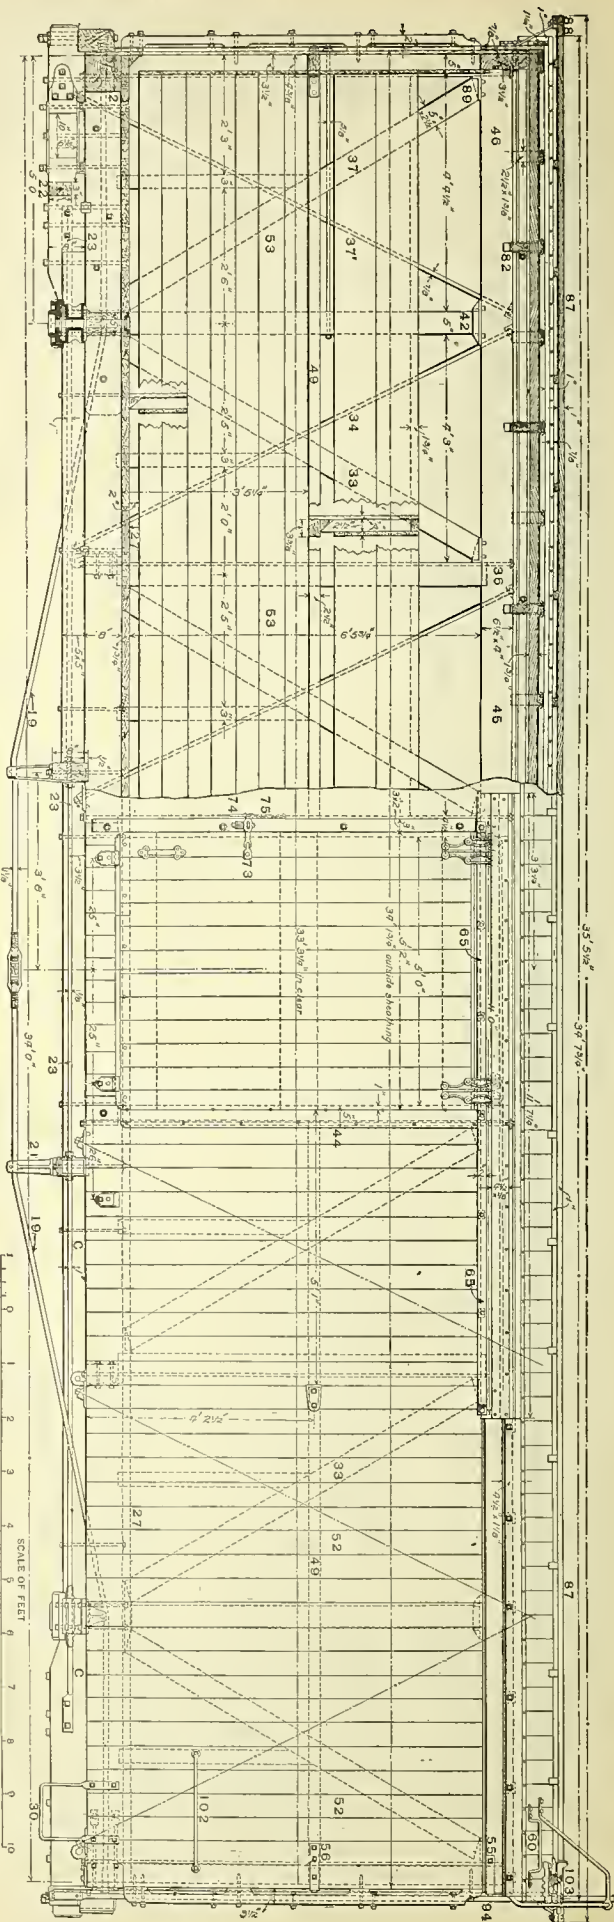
Part Longitudinal Section and Part Side Elevation.
